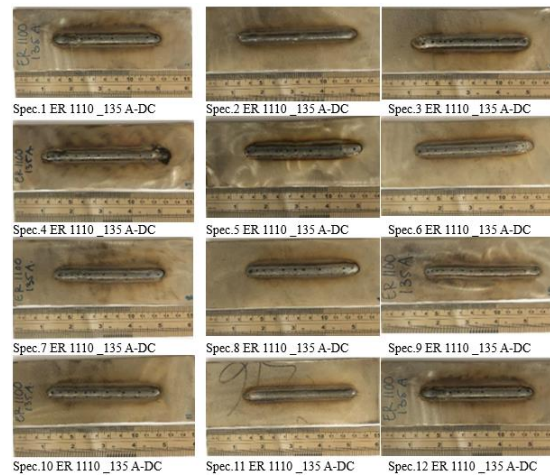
First layer welding bead at 135 A current filler ER1100 with DC polarity.
